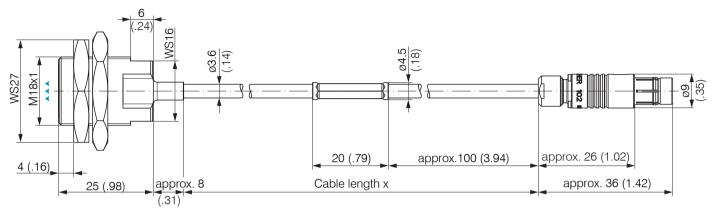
Dimensional drawing sensors ES-S4-C-CAx/mB0, dimensions in mm (inches)
